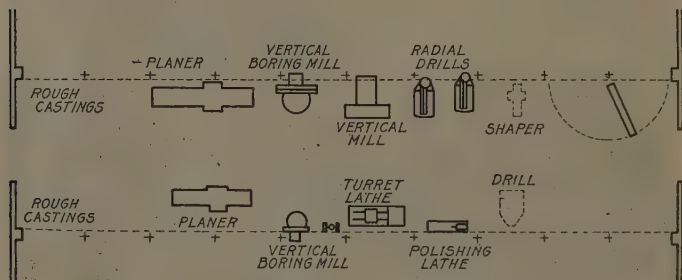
LAYOUT OF DEPARTMENT FOR TURRET AND SADDLE MACHINERY
